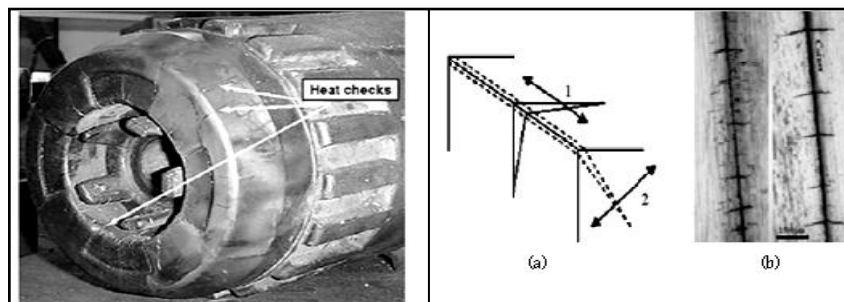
Heat checking in die-casting dies [41]. Figure 3.8 (a) Schematic of crack direction, (b) Corner cracks [41].
